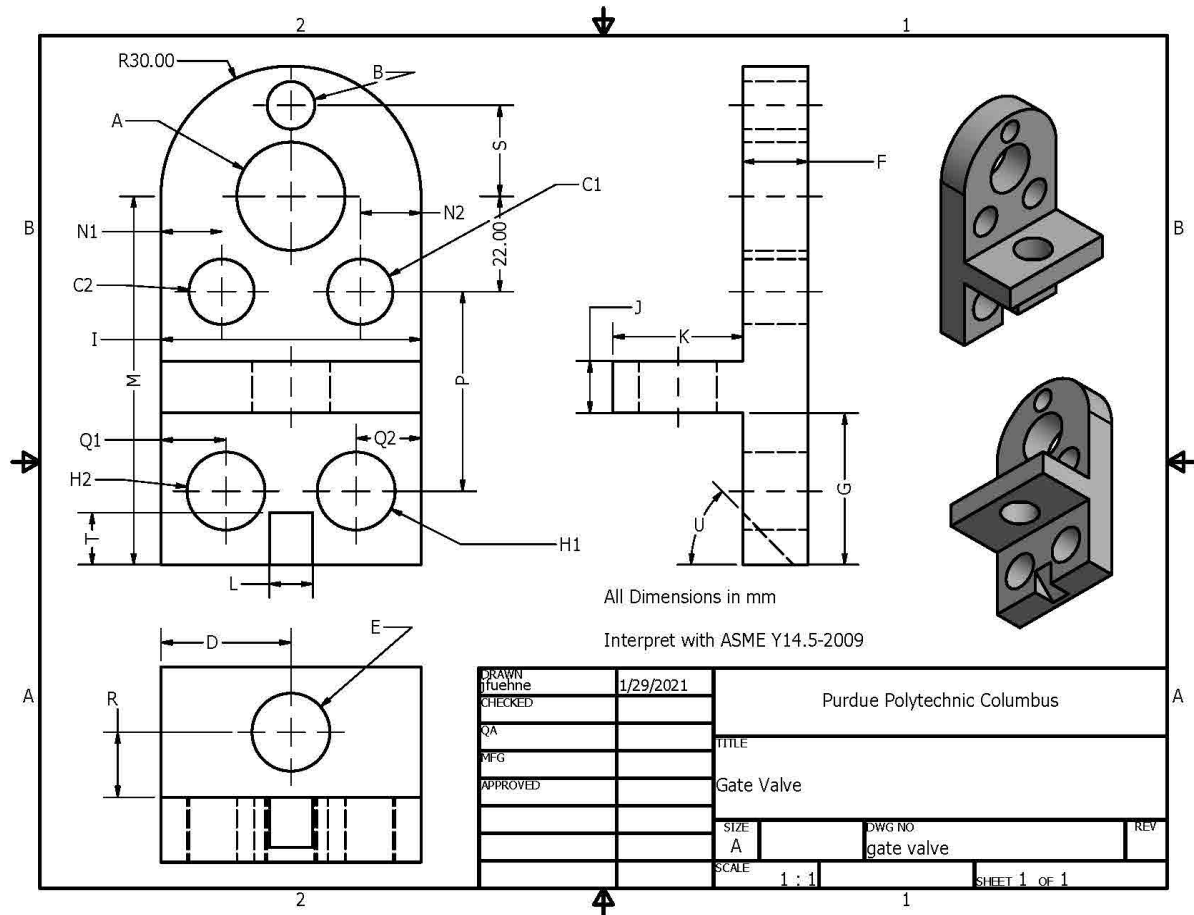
Drawing of the part indicating dimensions to measure using letters. Each student has their own 3D printed part.
